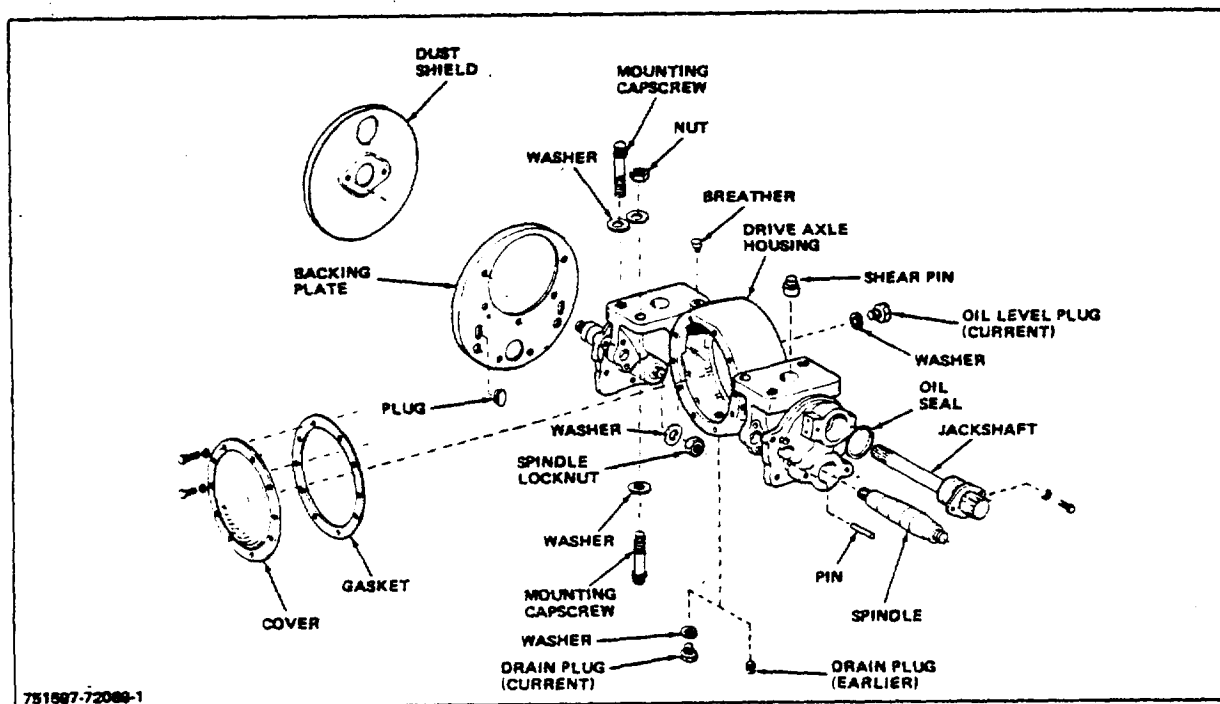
Drive Axle Housing Assembly (ACE 35 thru 55)
